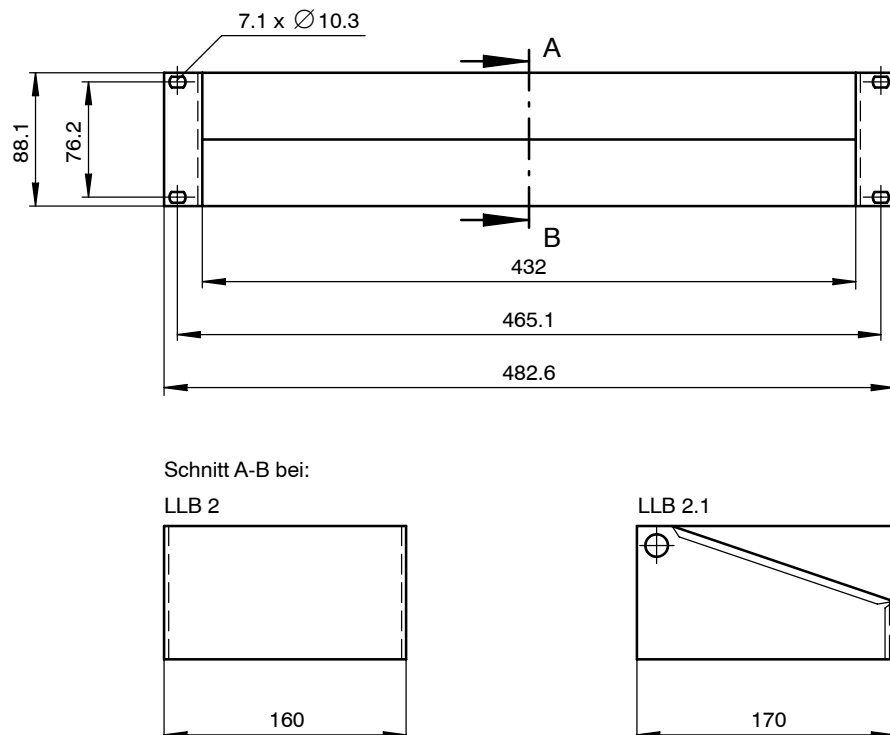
Dimension Drawing LLB 2, LLB 2.1
